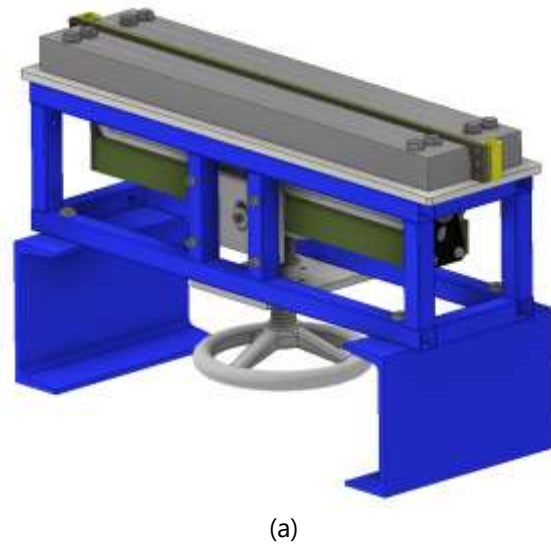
Clamp for welding flat and cylindrical workpieces made of thin sheet metal
